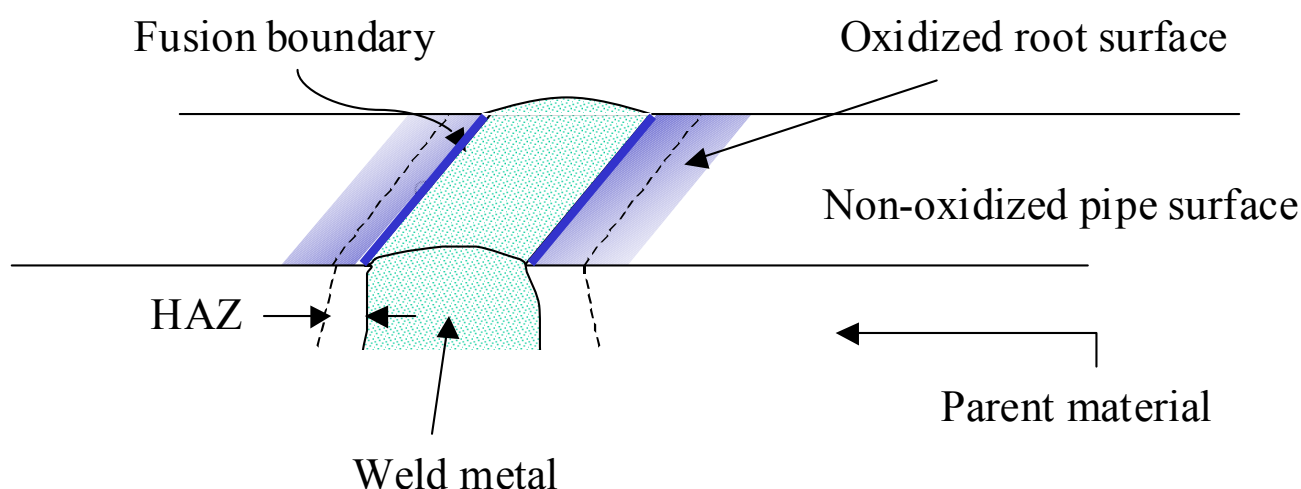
Definitions and notations used in the text to describe the root side of the SMSS weld.
